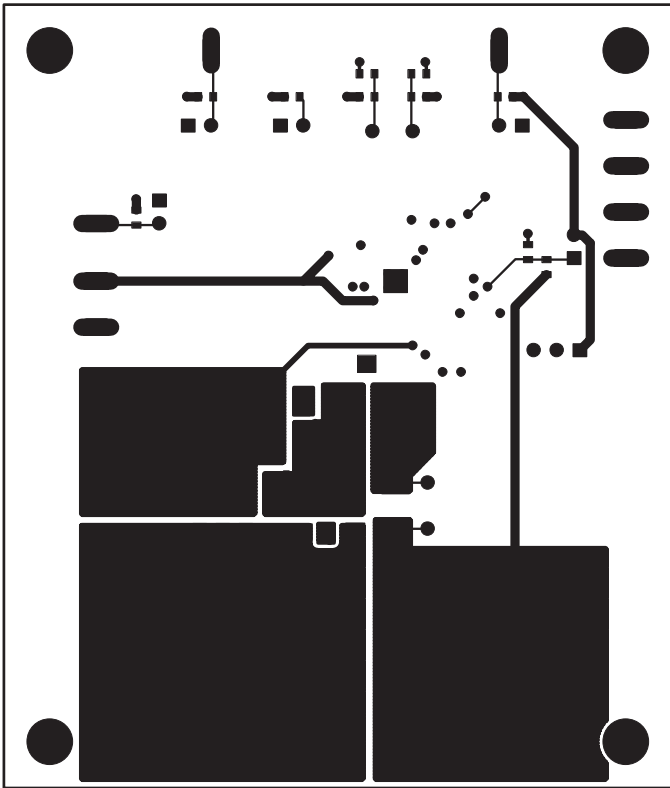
MAX17000 EV Kit PCB Layout—Component Side
